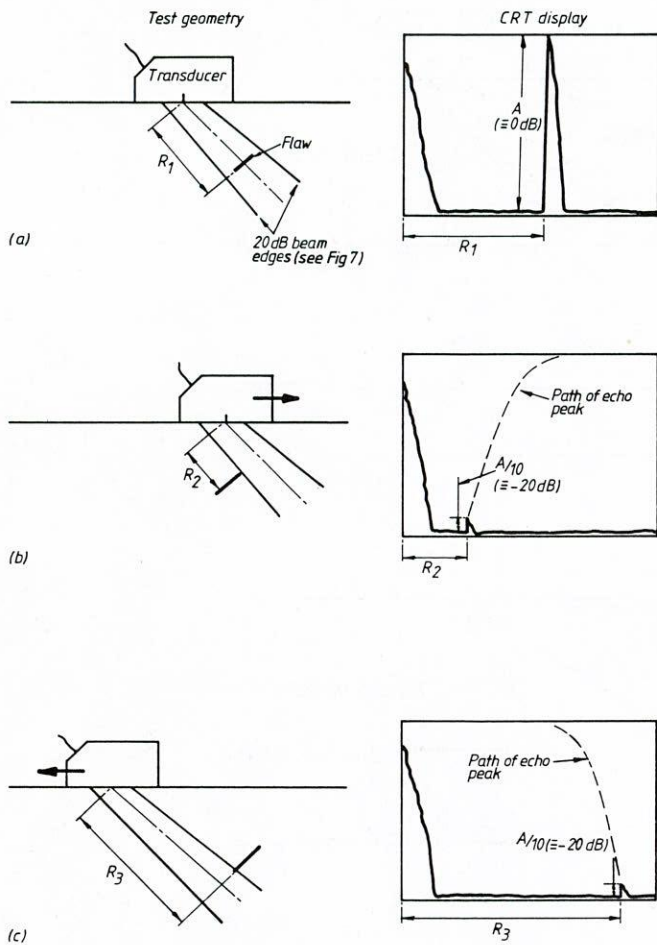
Elements of probe movement technique for flaw sizing; (a) maximum amplitude position, (b) transducer moved forward so lower beam edge coincides with upper edge of flaw, and (c) transducer moved backward so upper beam edge coincides with lower edge of flaw.
